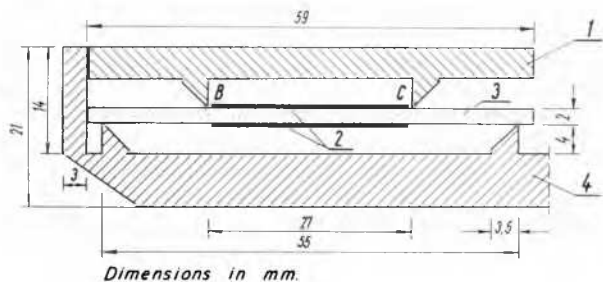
Cross-section of a detail of plate B with the pressure gauge. 1, gauge plate; 2, strain gauges; 3, spring; 4, basic part of plate.
